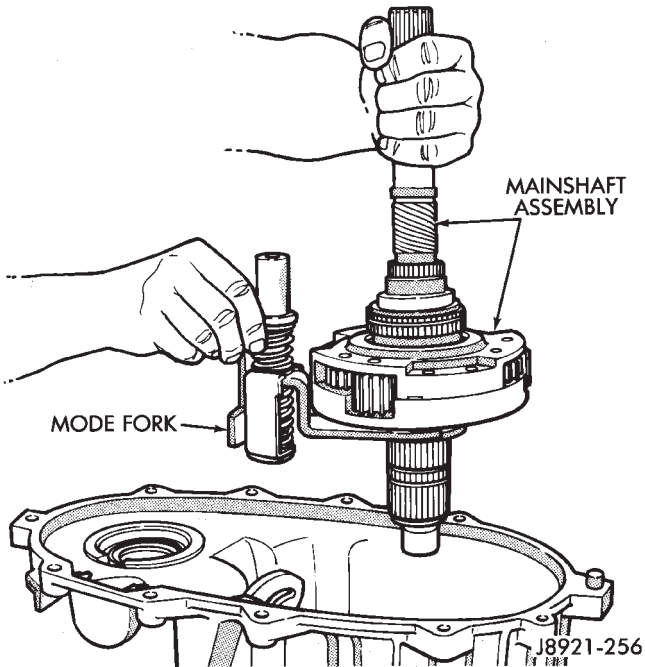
Assembled Mainshaft And Mode Fork Installation
